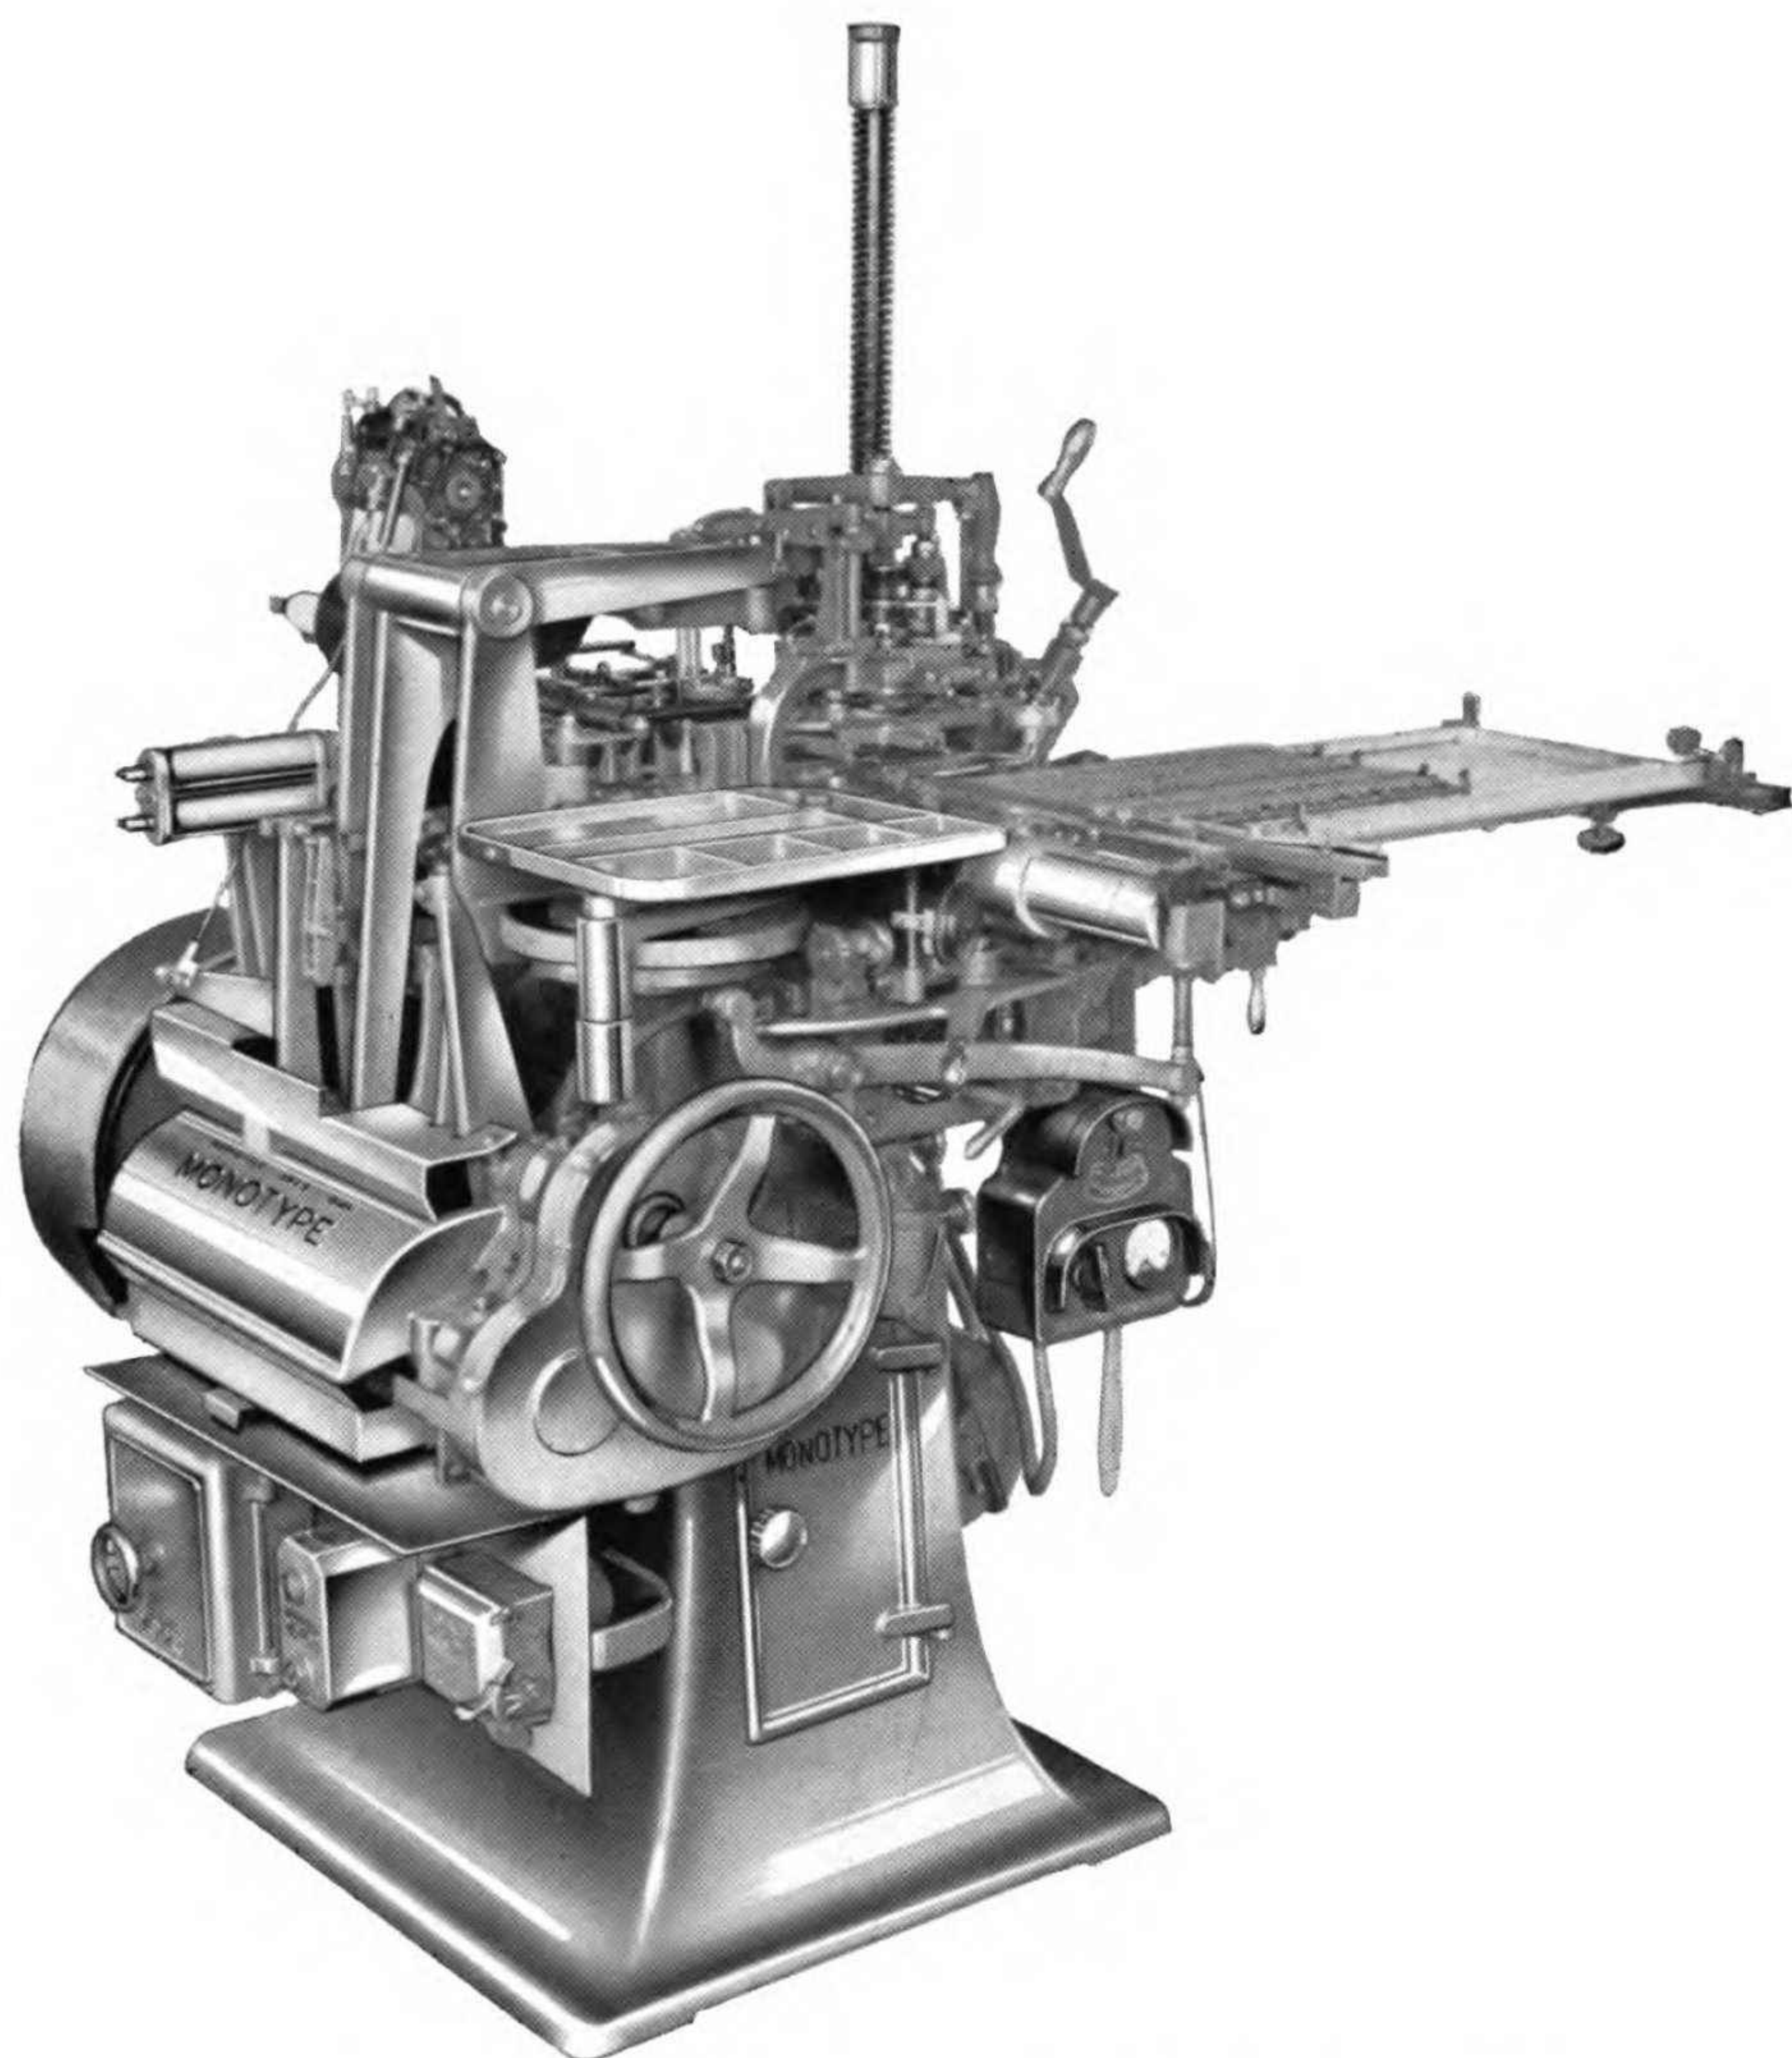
PLATE IV. A 'MONOTYPE' CASTING MACHINE
